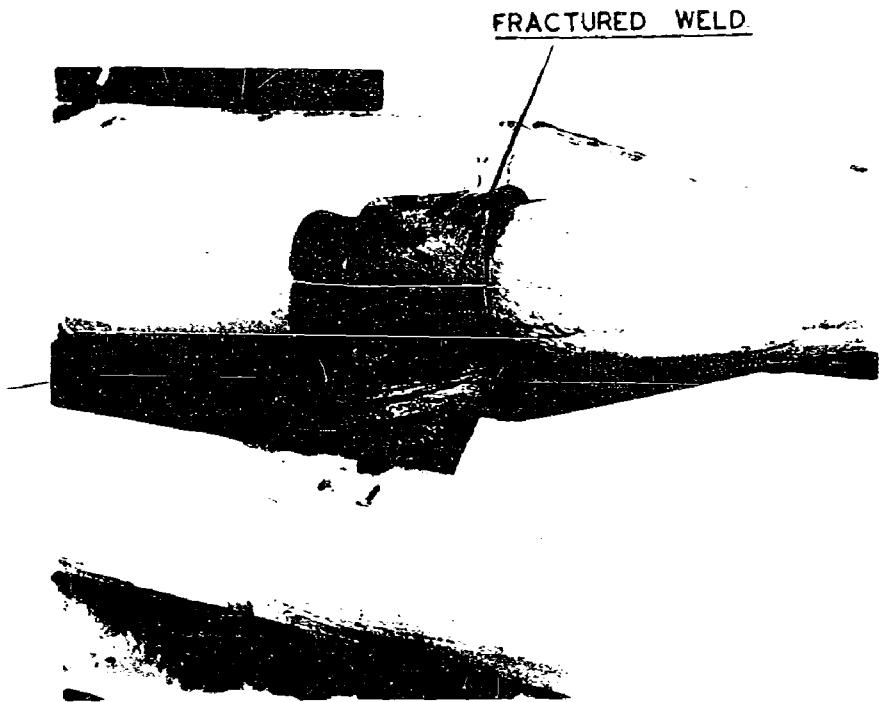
E19 R1 MECHANICAL SMOKE GENERATOR
